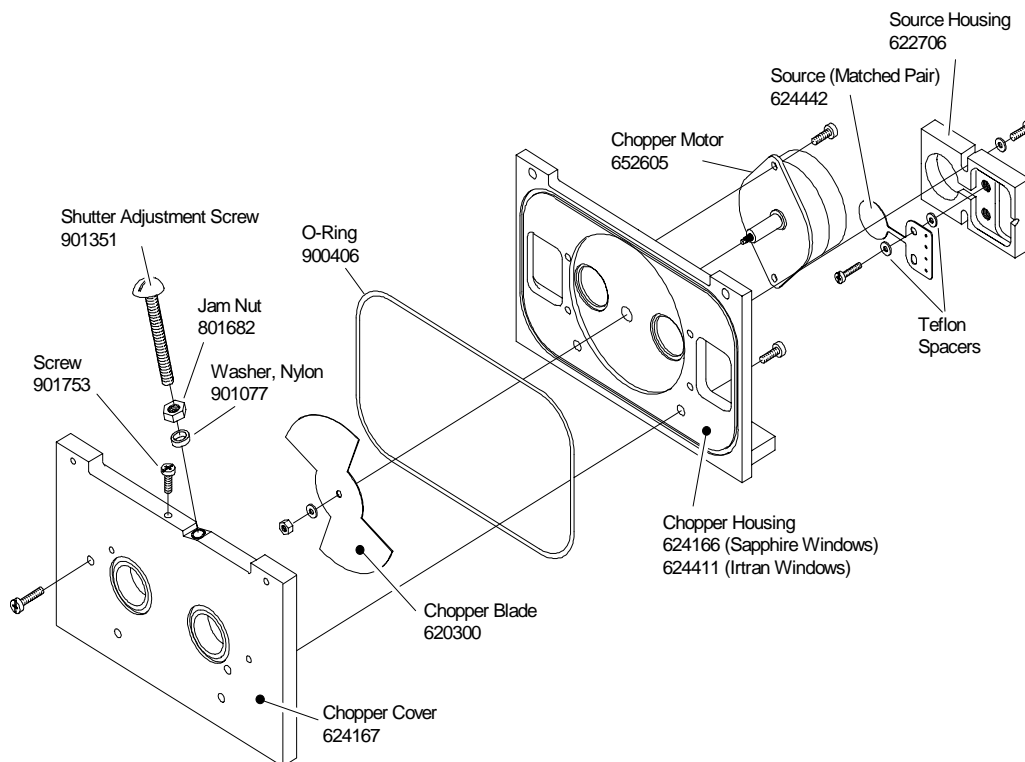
MOTOR/SOURCE ASSEMBLY
